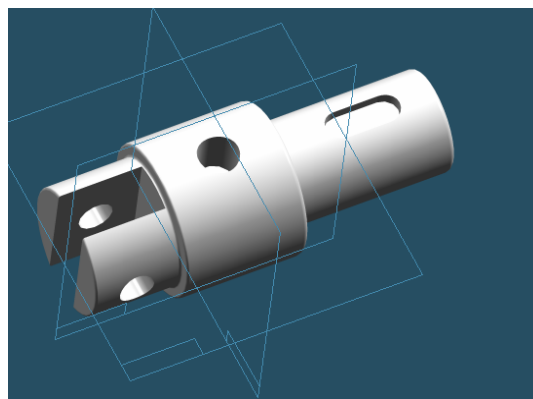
Solid model of a shaft obtained with Solid Edge Part
